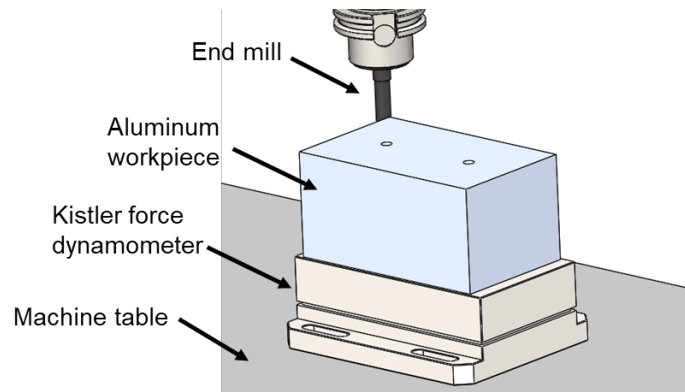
Machine setup for cutting force measurements using Kistler 9257B cutting force dynamometer.
